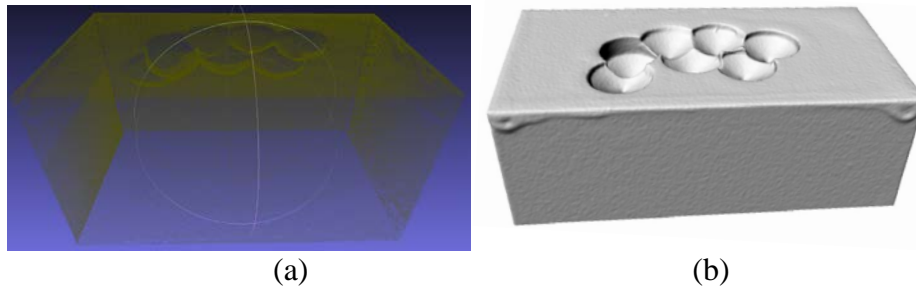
An H13 tool steel substrate with ball-indented damage on the top surface
